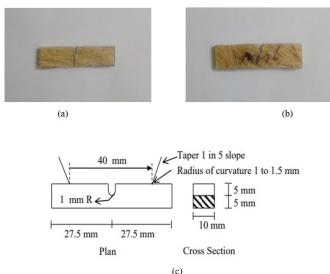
Impact test specimen (a) single layer, (b) Double layer specimen and c) Standard Impact test specimen
